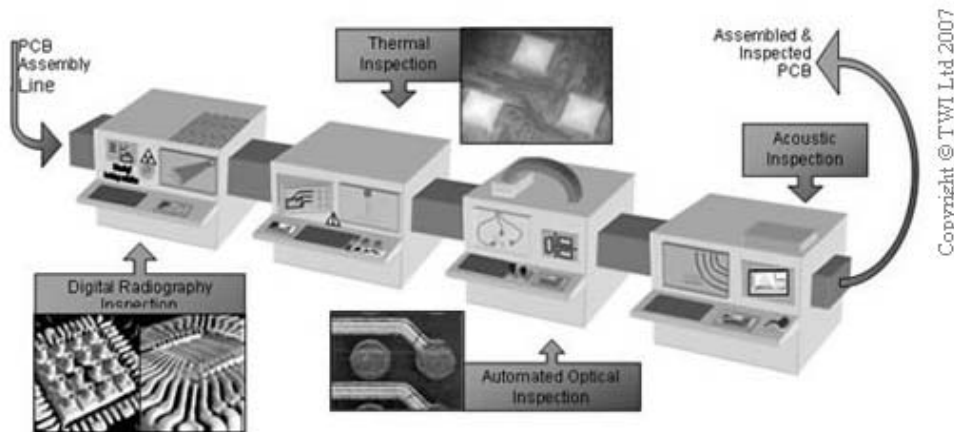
Conceptual drawing of in-line PCB inspection system
